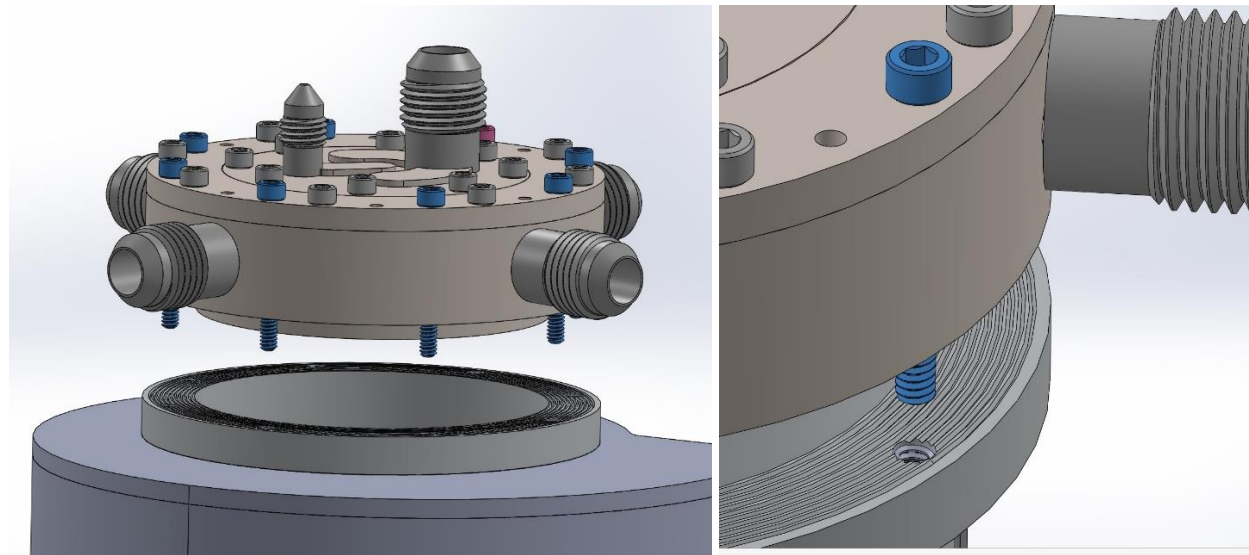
a) At left, the injector assembly above the chamber. Eight screws used for mechanical retention highlighted in blue. Grafoil gasket not shown for clarity. b) At right, a close up of the seal interface showing the Helicoil insert, the blue A286 fastener, and the surface grooves for the Grafoil mating surface. Grafoil gasket not shown for clarity.
